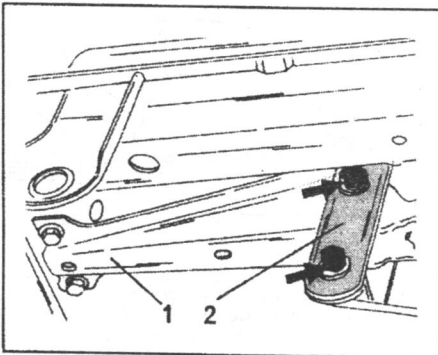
The arrows show the nuts securing the spring shackle plate (2) which is secured to the spring bracket (1) and the spring.
